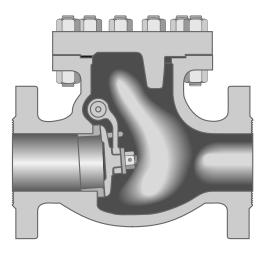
Flanged Figure 159¹/₂ Butt Weld
